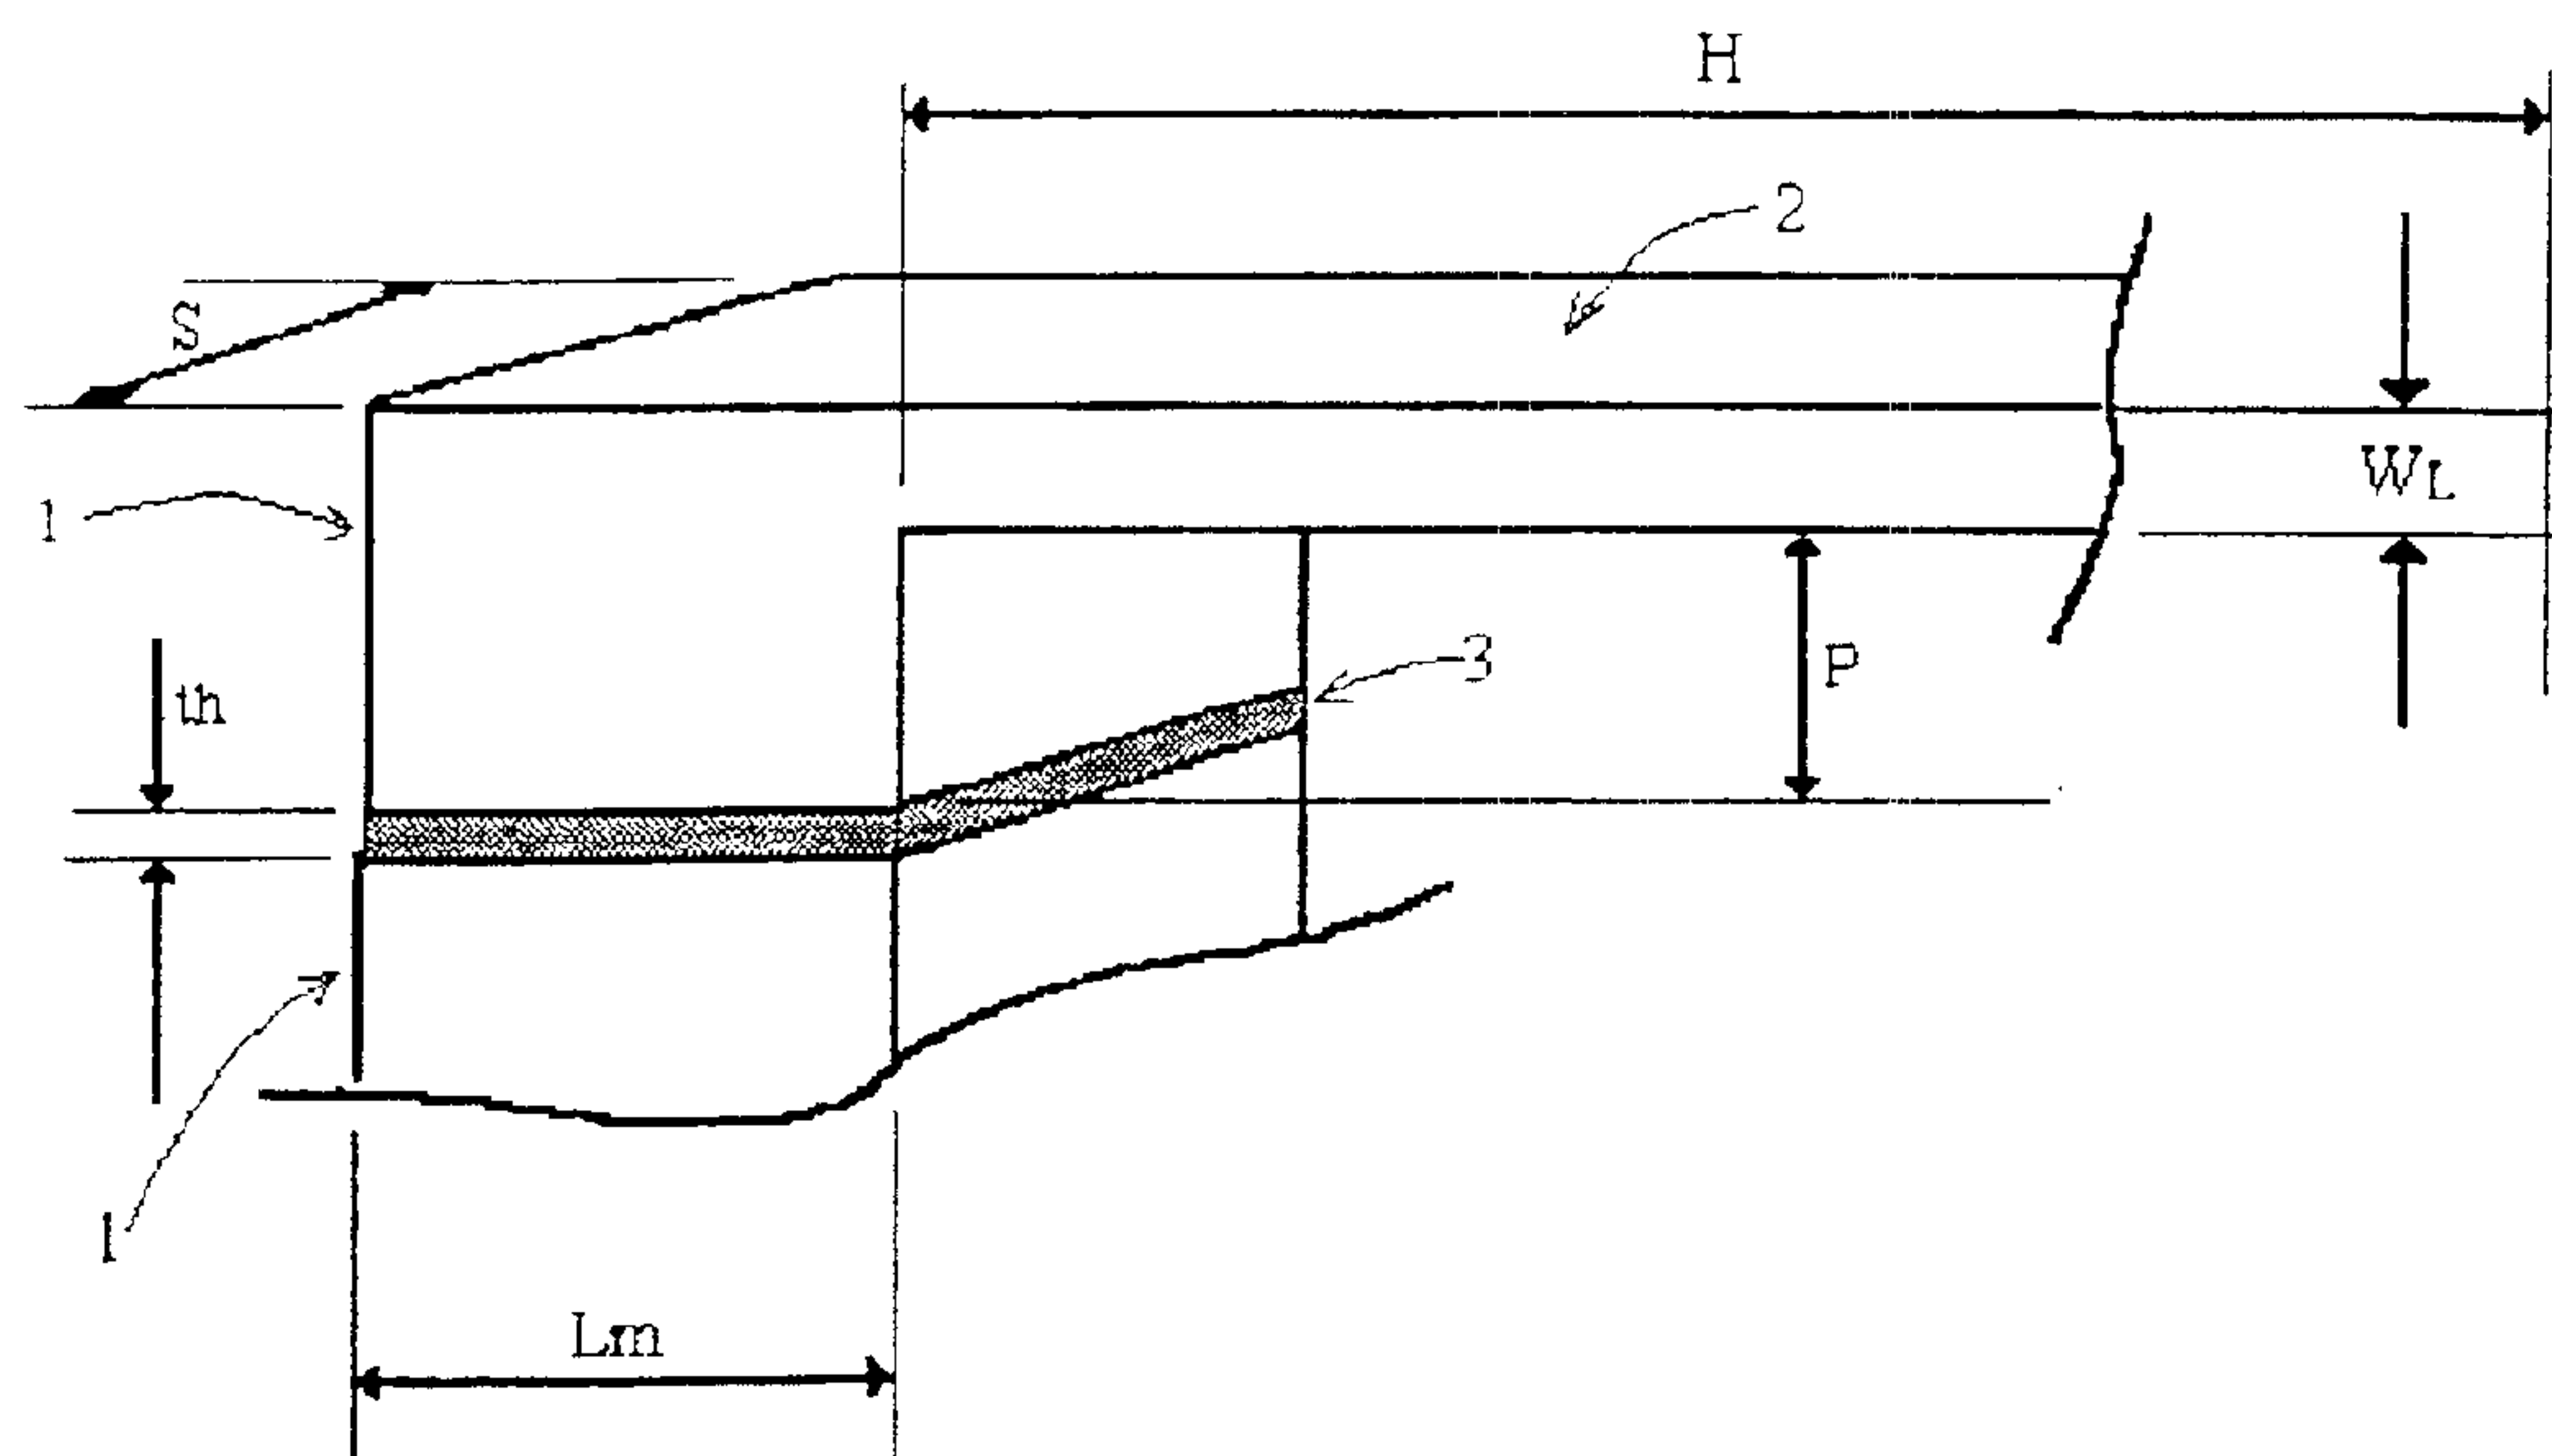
TOROIDAL FORM OF MAGNECORE WITH 2 POLE PIECES
